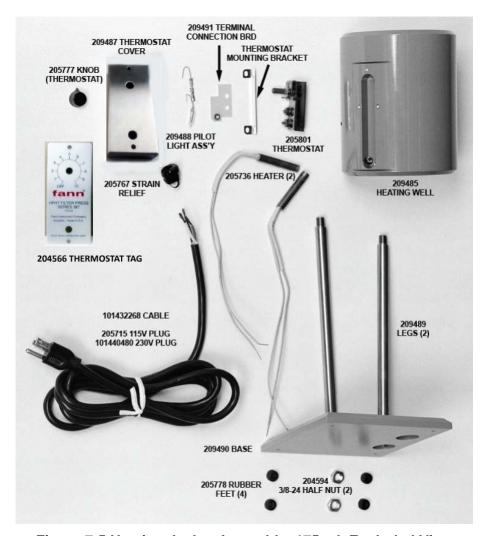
Heating Jacket Assembly, 175 ml, Exploded View
